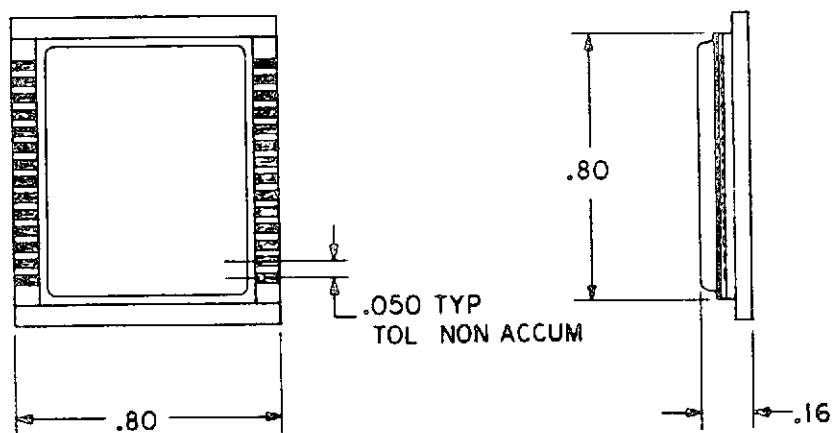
CONCEPTUAL PACKAGING LAYOUT FOR HYBRID CONTROL CIRCUIT ASSEMBLY
